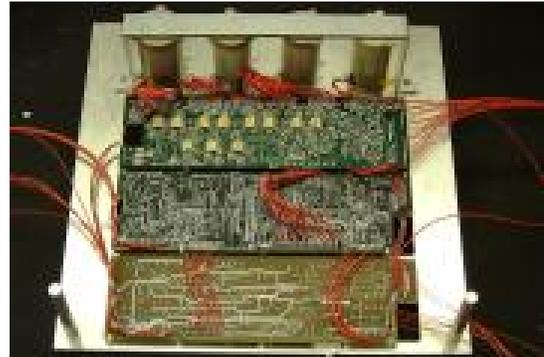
Figure X. Single Side of BEU Electronics On Assembly Fixture Before Folding. Assembly requires careful folding of analog wiring between boards and inductors.
